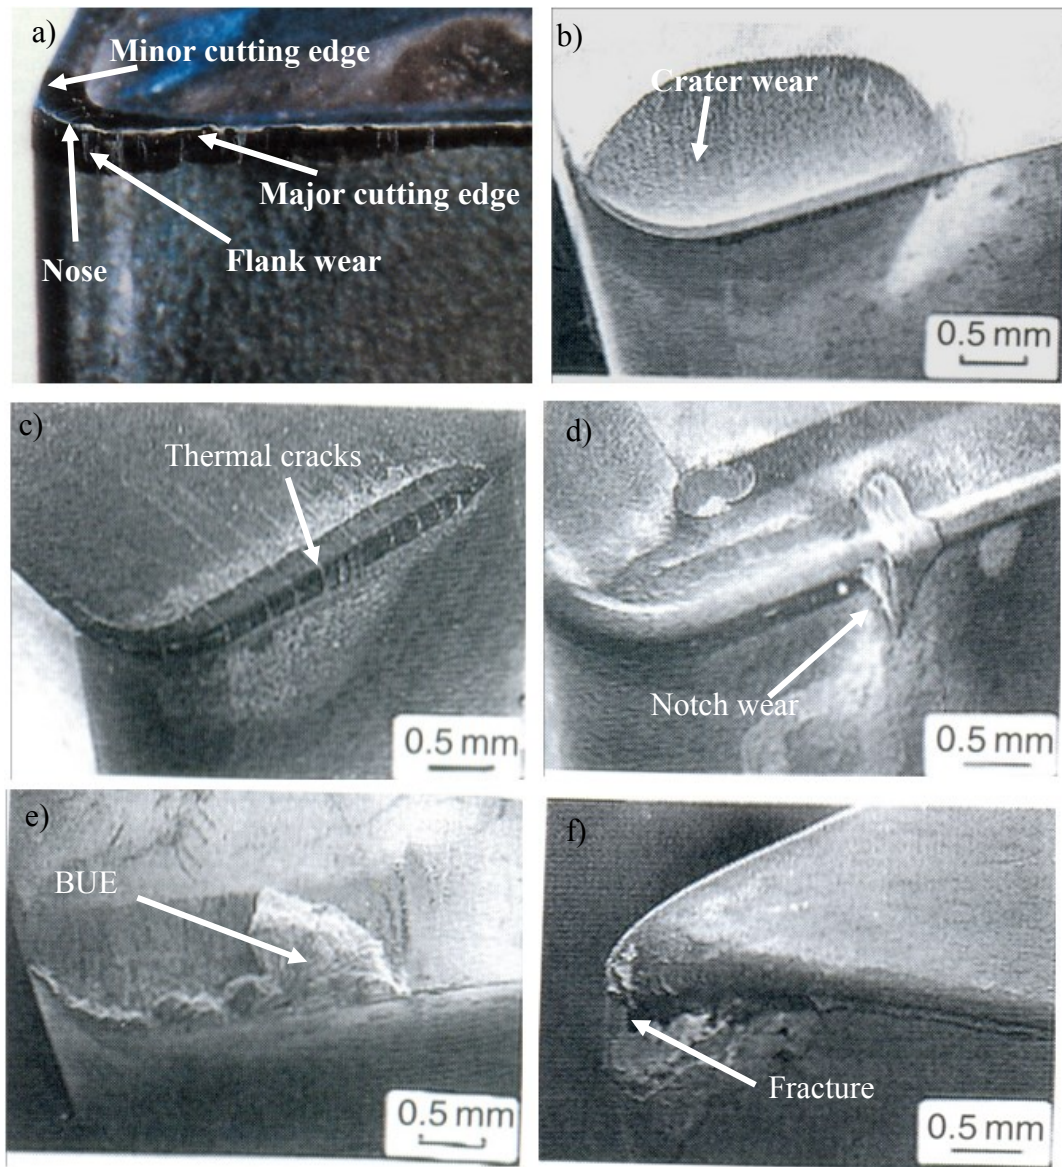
Types/patterns of wear (a) flank wear [27]; (b) crater wear; (c) thermal cracks; (d) notch wear; (e) BUE and (f) fracture [5]
